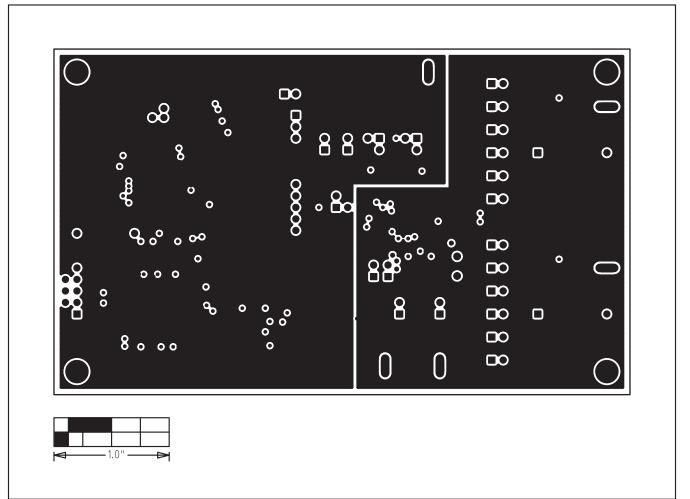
MAX11014 EV Kit PCB Layout—Inner Layer 2
